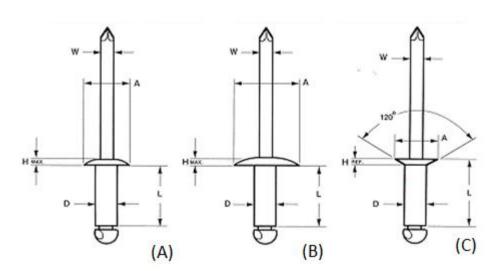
Special (blind) rivets: (A) – dome, (B) – Large Frank and (C) – countersunk head
